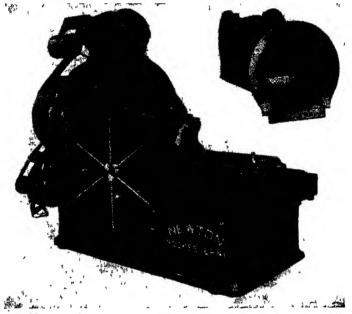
Newton planetary-type milling machine used in the automobile and similar industries.
